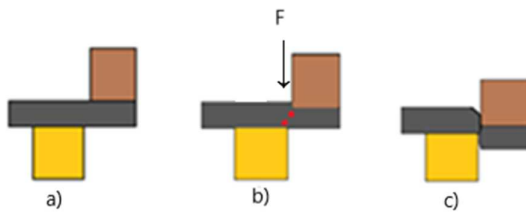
Phases of a shearing process: a – achieving contact between the workpiece and the tools; b – the appearance and propagation of cracks; c – the actual separation of a part of the workpiece
